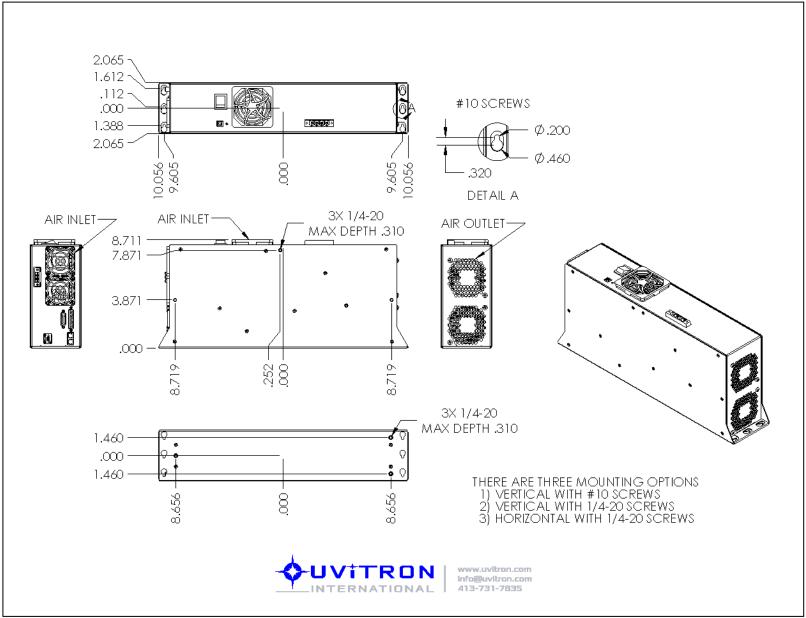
, HiWatt overall dimensions and Mounting hole locations
